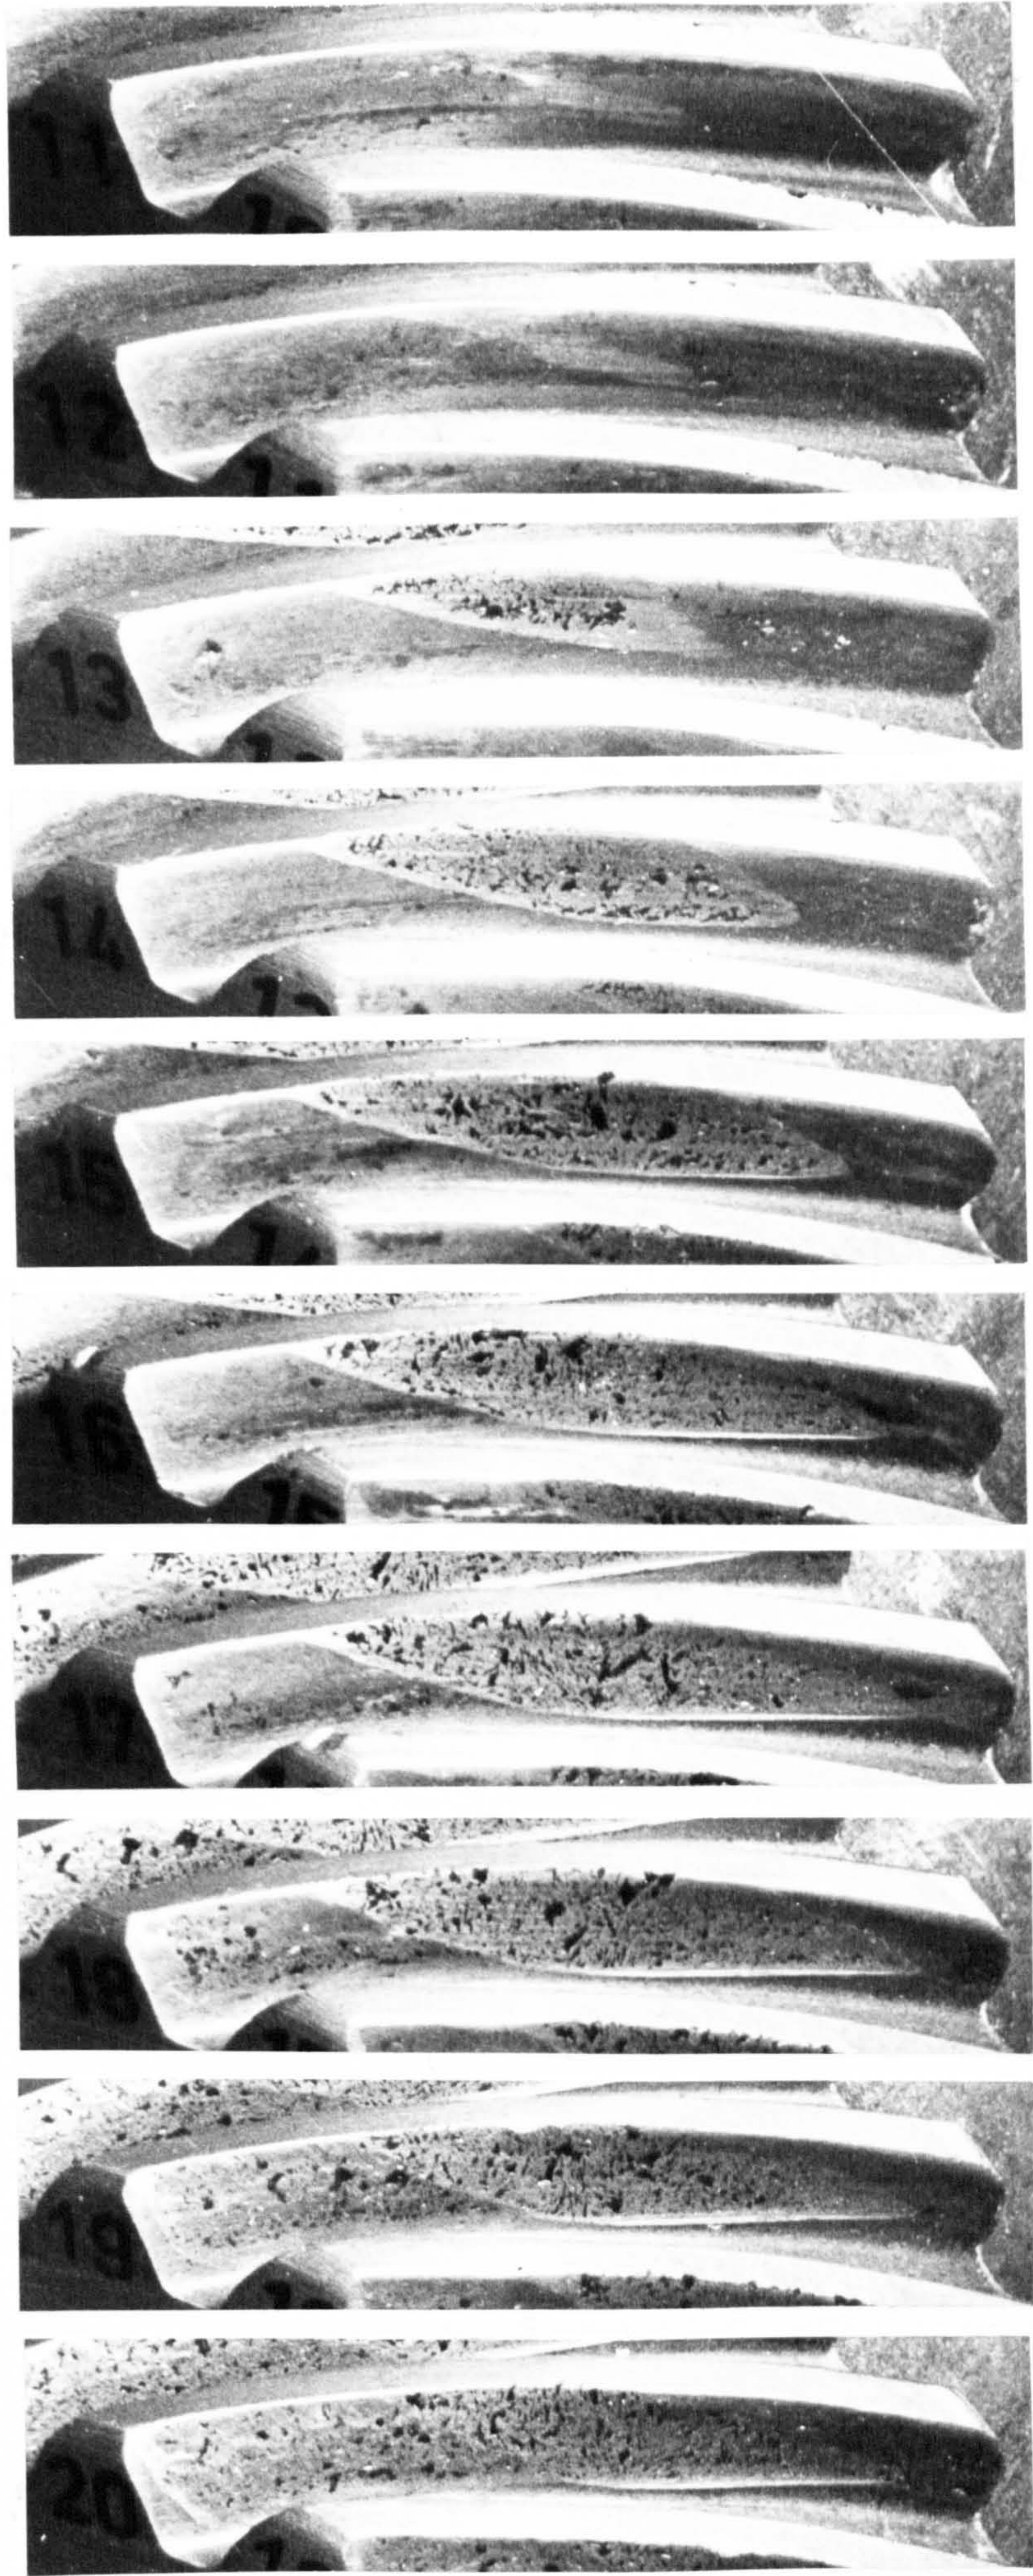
(b) Side 1, tooth numbers 11 - 20
